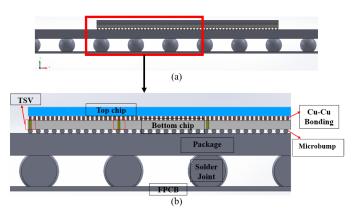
(a) Front view of the package and (b) Scale-up view of the package
